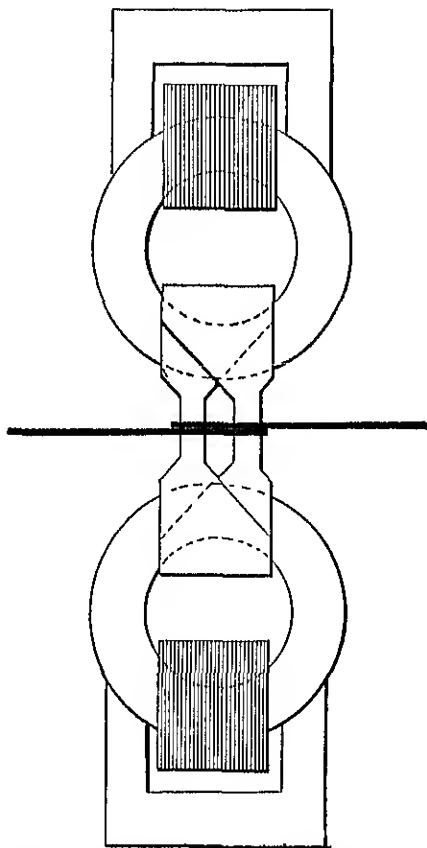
Bouchayer's Spot Welding Machine, Using Duplex Copper Electrodes.
